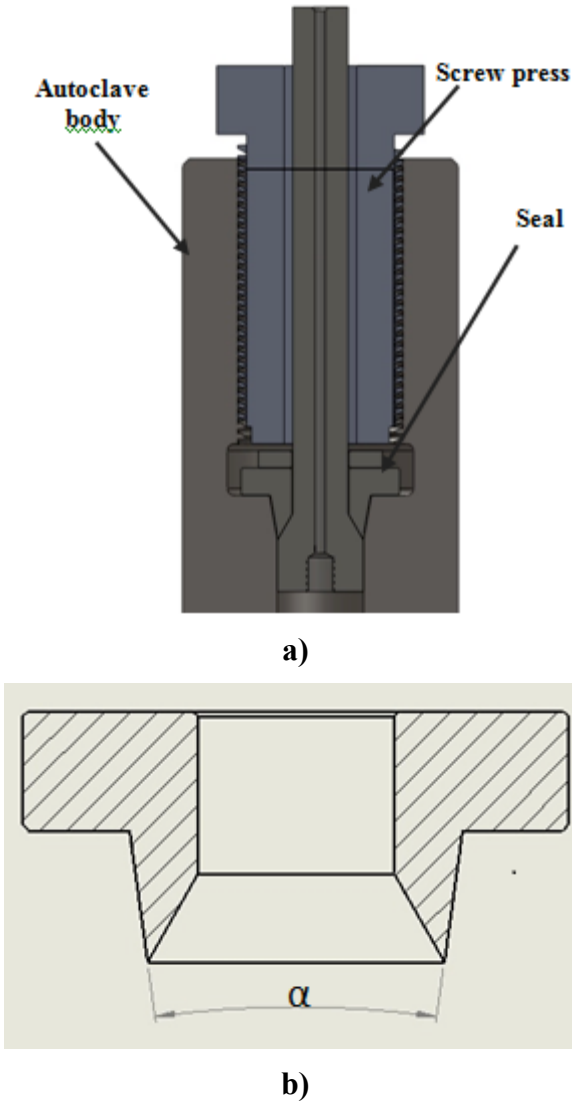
Parts of the autoclave : a) Section in autoclave, b) Execution drawings of the seal
